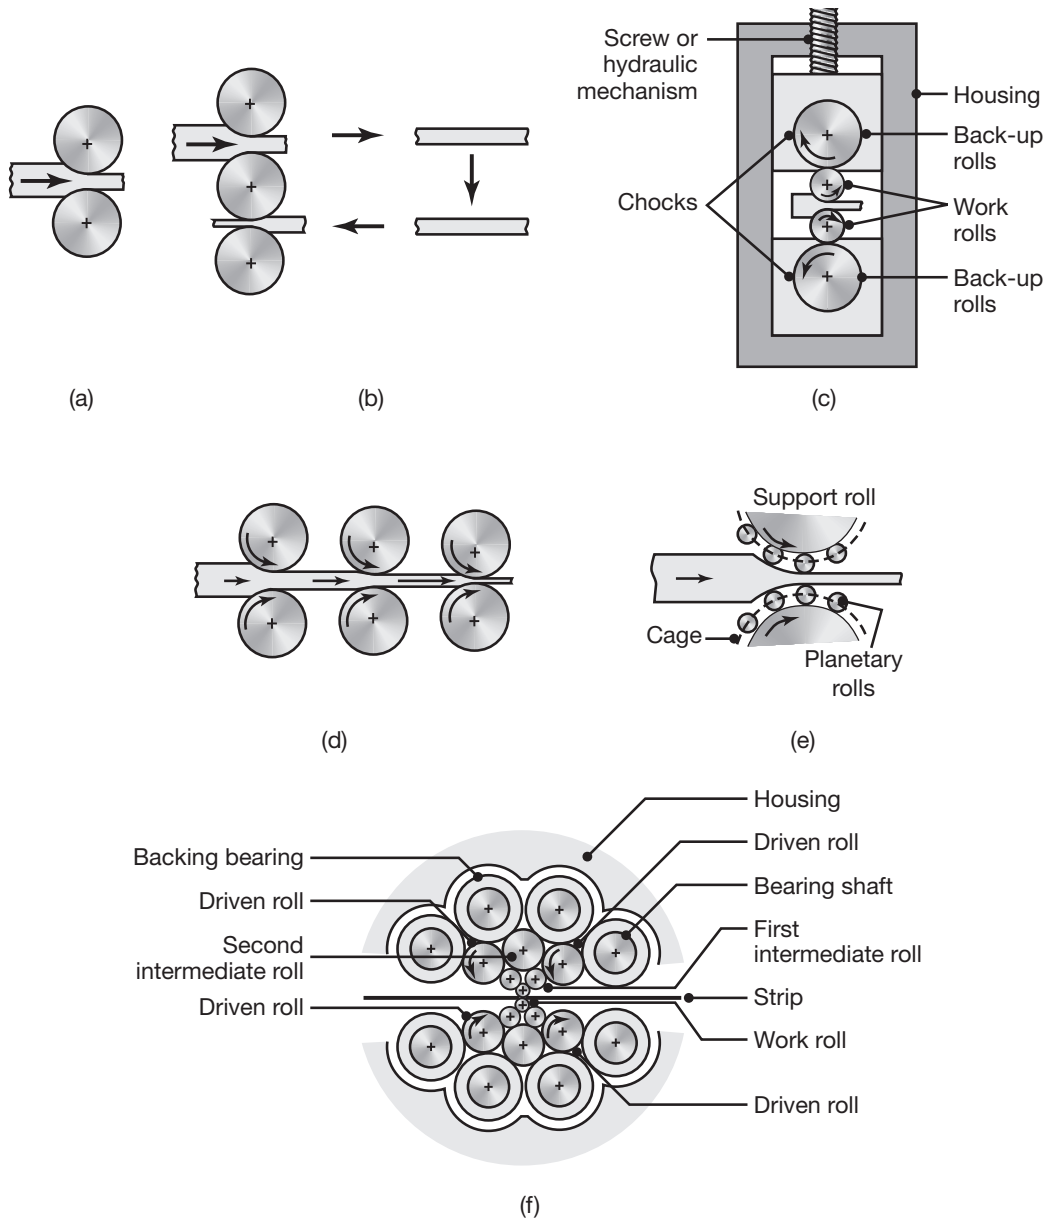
Schematic illustration of various roll arrangements: (a) two-high mill; (b) three-high mill; (c) four-high mill; (d) tandem rolling, with three stands; (e) planetary mill; and (f) cluster (*Sendzimir*) mill.
